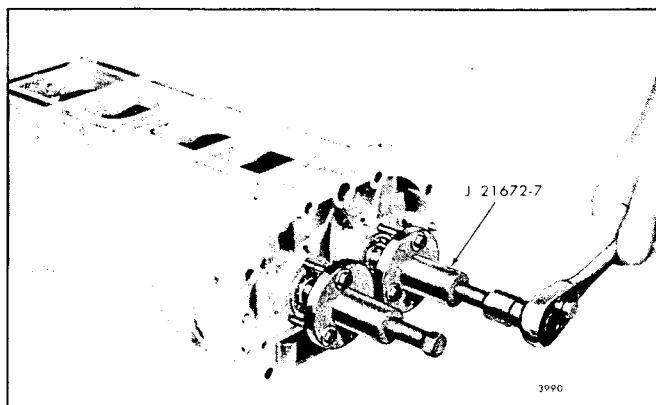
Removing Blower Rotors from Front End Plate Ball Bearings (Former Blower)
